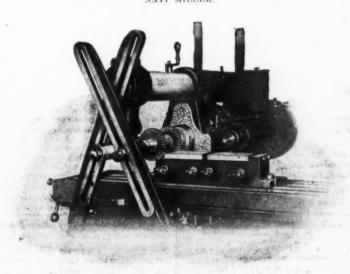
STRADDLE MILLING THE EDGES OF THE PIECES ON A No. 3 PLAIN CINCINNATI MILLER.
